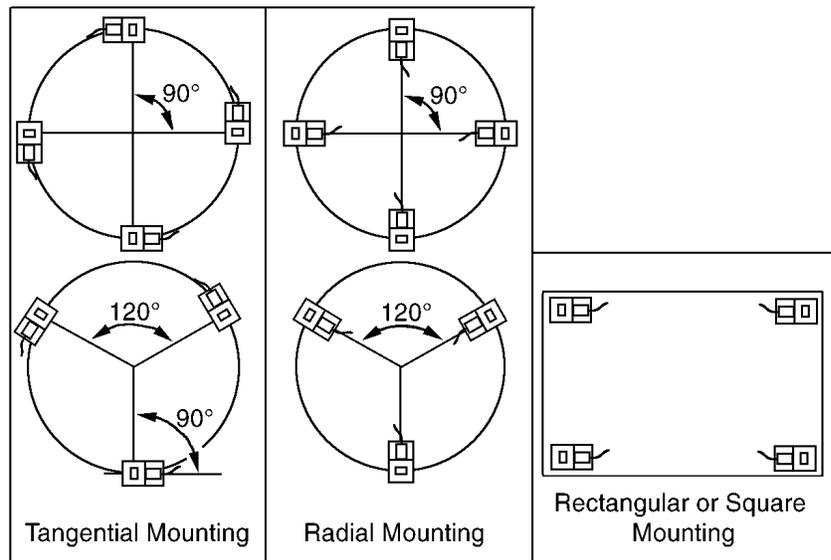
Plan View of Mounting Arrangements for Ultramount Weigh Modules
